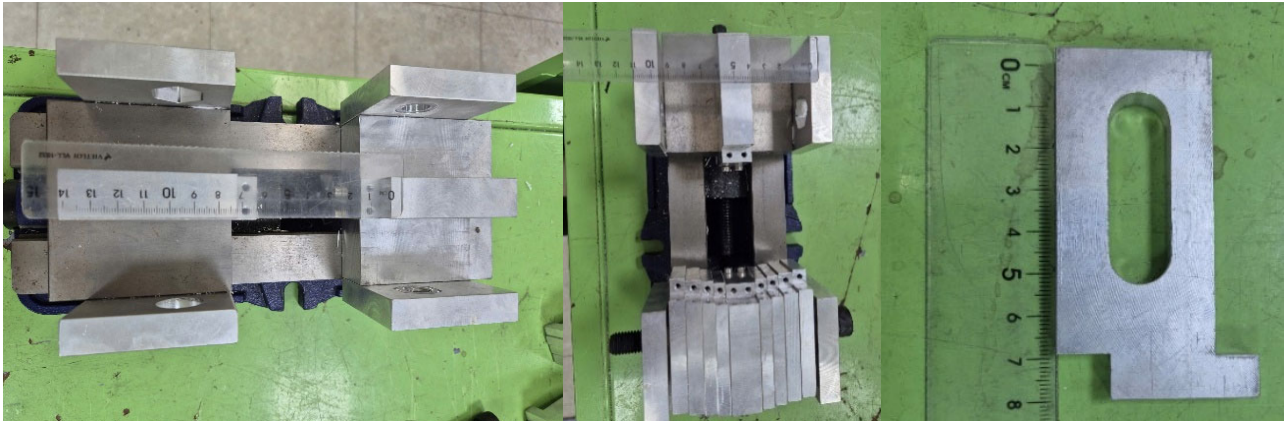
Prototype of the modular flexible fixture with a ruler for dimensional reference.
